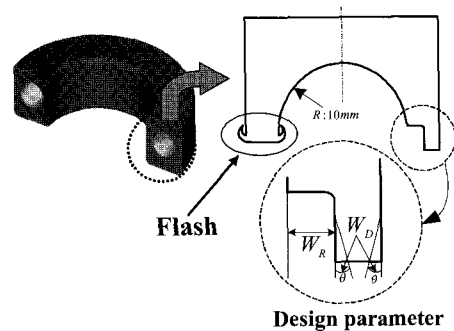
Welding part model with flow gallery and Design parameter welding part
